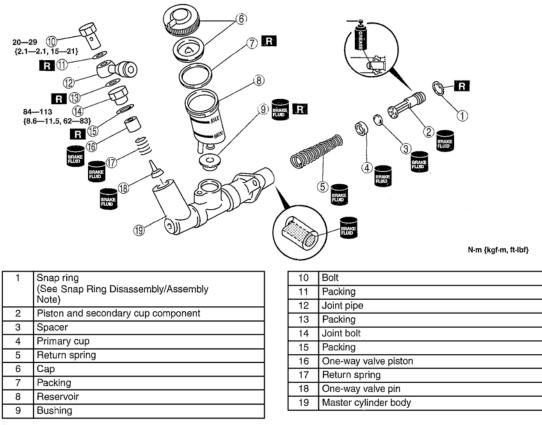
Disassembling Clutch Master Cylinder (BP) Courtesy of MAZDA MOTORS CORP.
